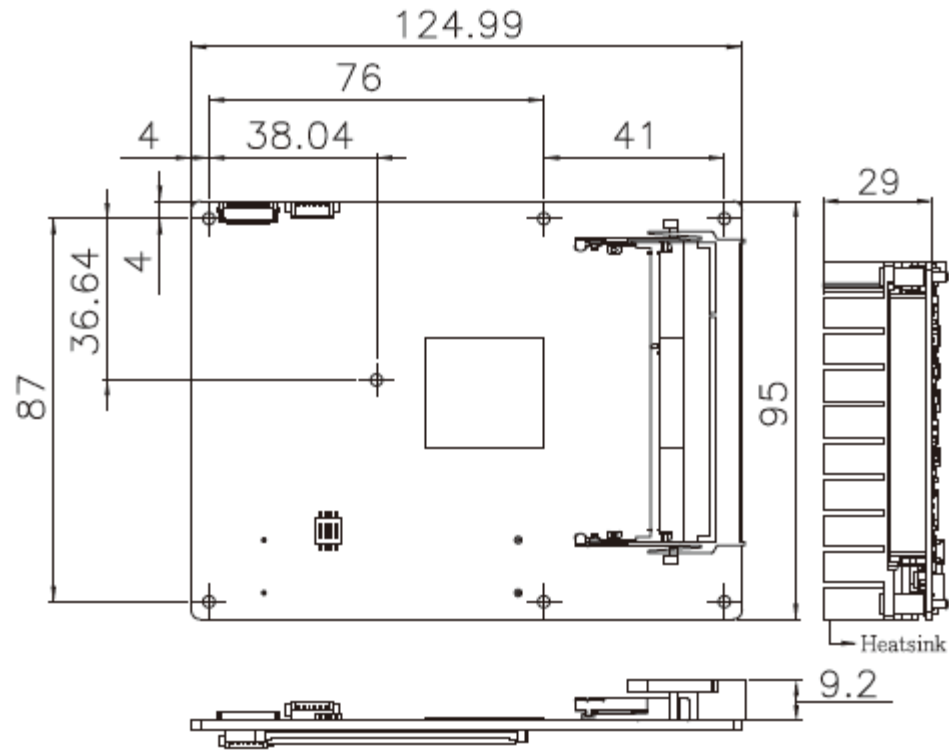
ICE-BT-T6 Dimensions (mm)
